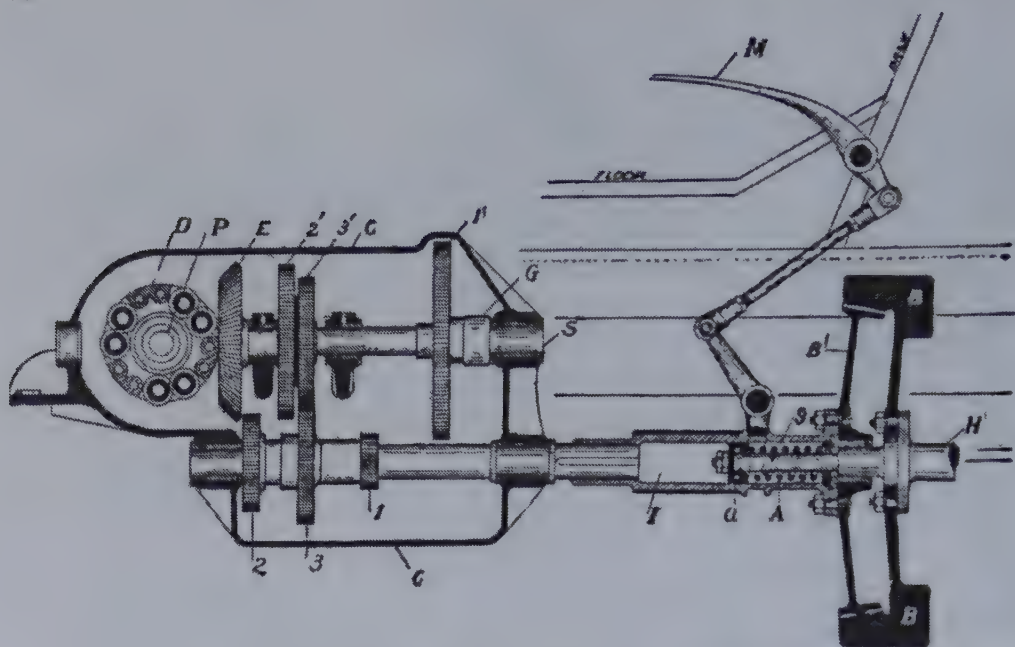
Illustration Showing the Clutch Pedal and its Purpose
